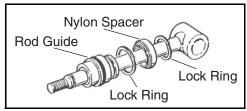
J-9. Nylon spacer, Lock Ring, and Rod Guide
